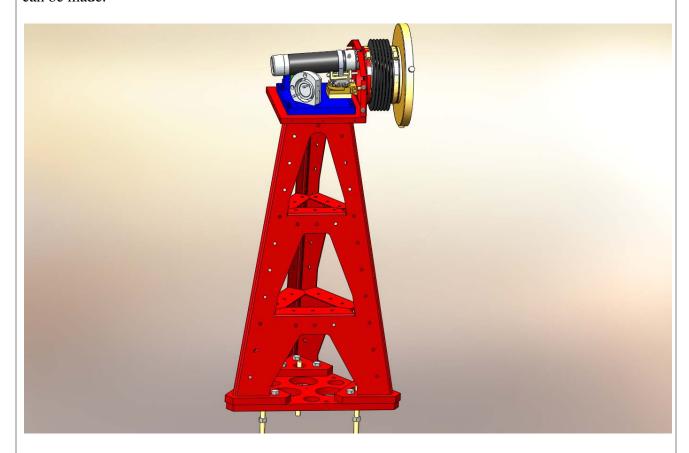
HAM Transceiver Pier Assembly. Shown with cover removed.
